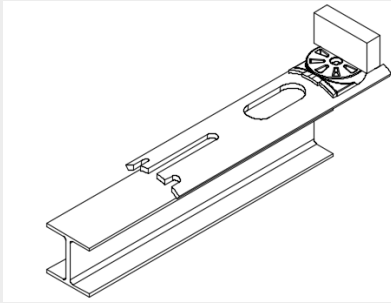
Isometric View IS20 Part, anchor, and force Block
